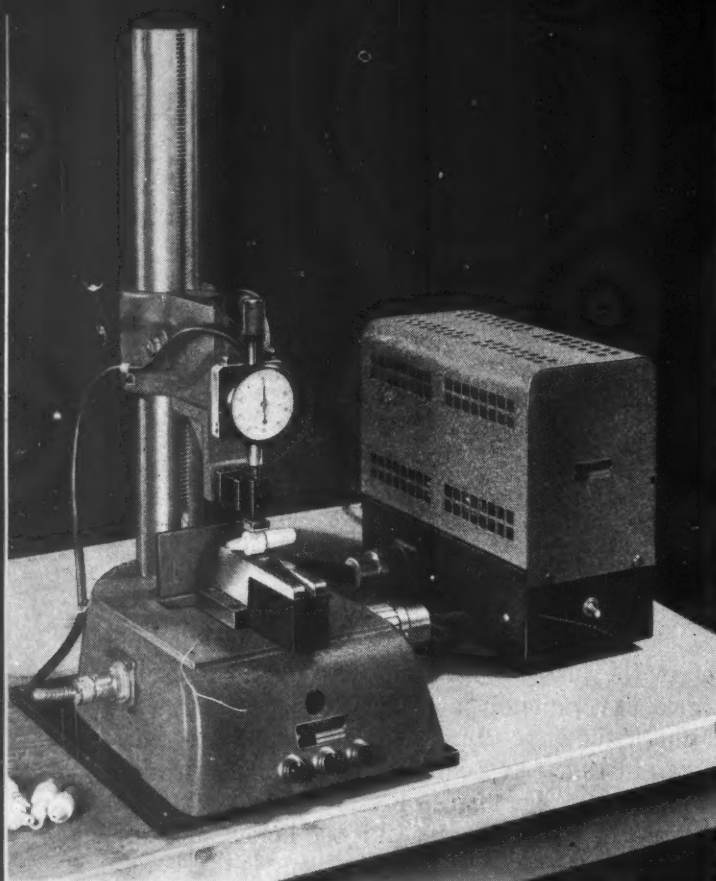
Diameters of spark-plug insulators are checked and the parts automatically sorted by this gage. Parts pushed under the measuring anvil fall down a chute into the box of proper classification—over size, under size, or correct
